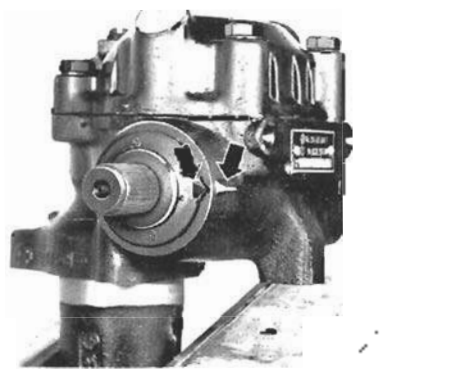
Centerpoint marks (arrows) that appear on late worm and pinion steering gearboxes.
